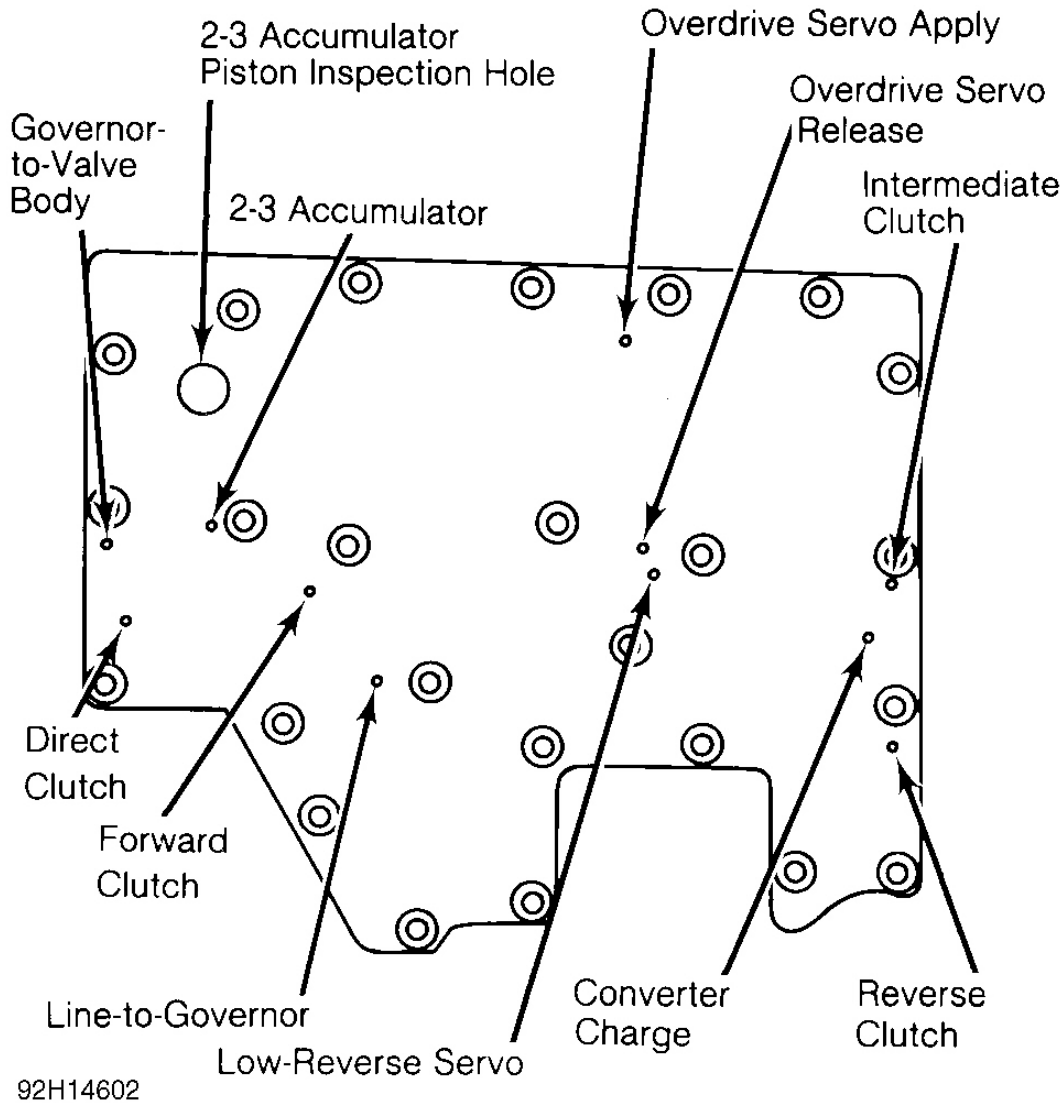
Identifying Air Pressure Test Apply Ports on Adapter Plate
